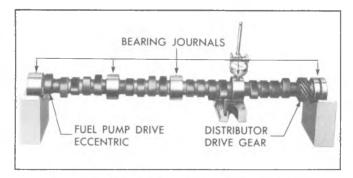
A-39--Checking Camshaft Alignment (Typical)
